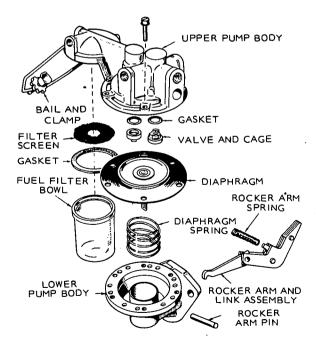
EXPLODED VIEW OF J-SERIES PUMP
